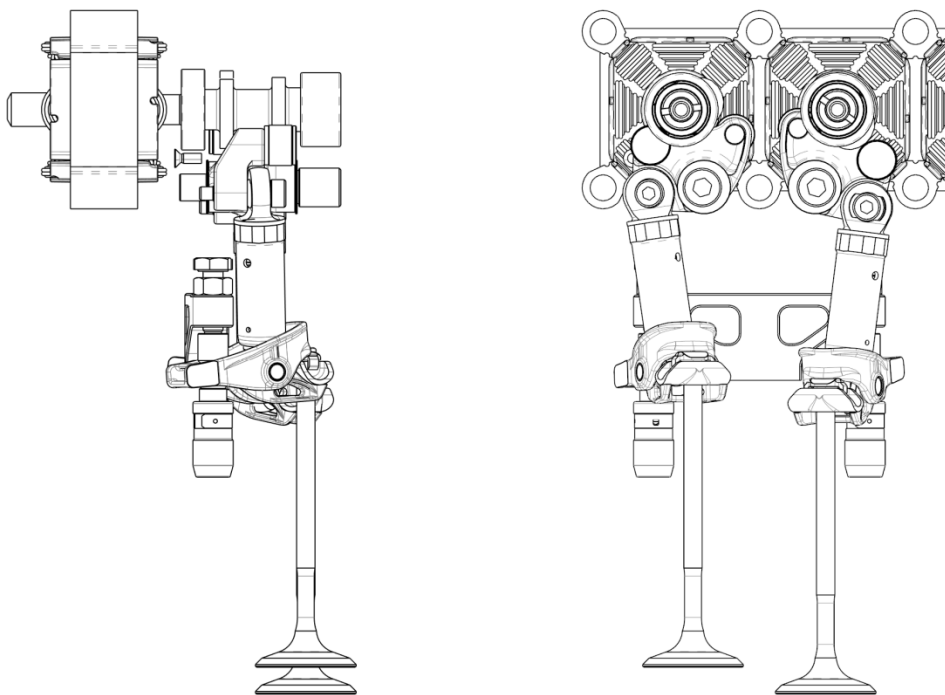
iVT mechanism, showing the multi-cylinder Stator arrangement
